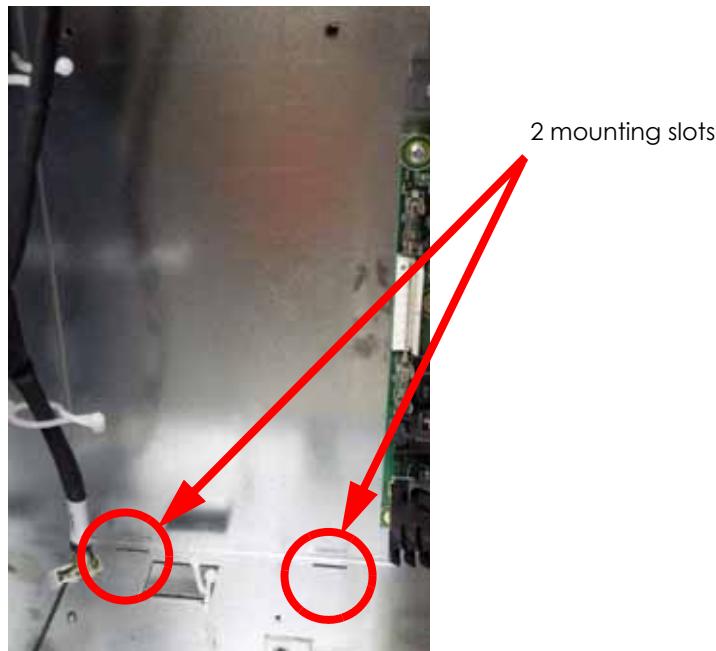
24 VDC power supply mounting bracket mounting screw locations
